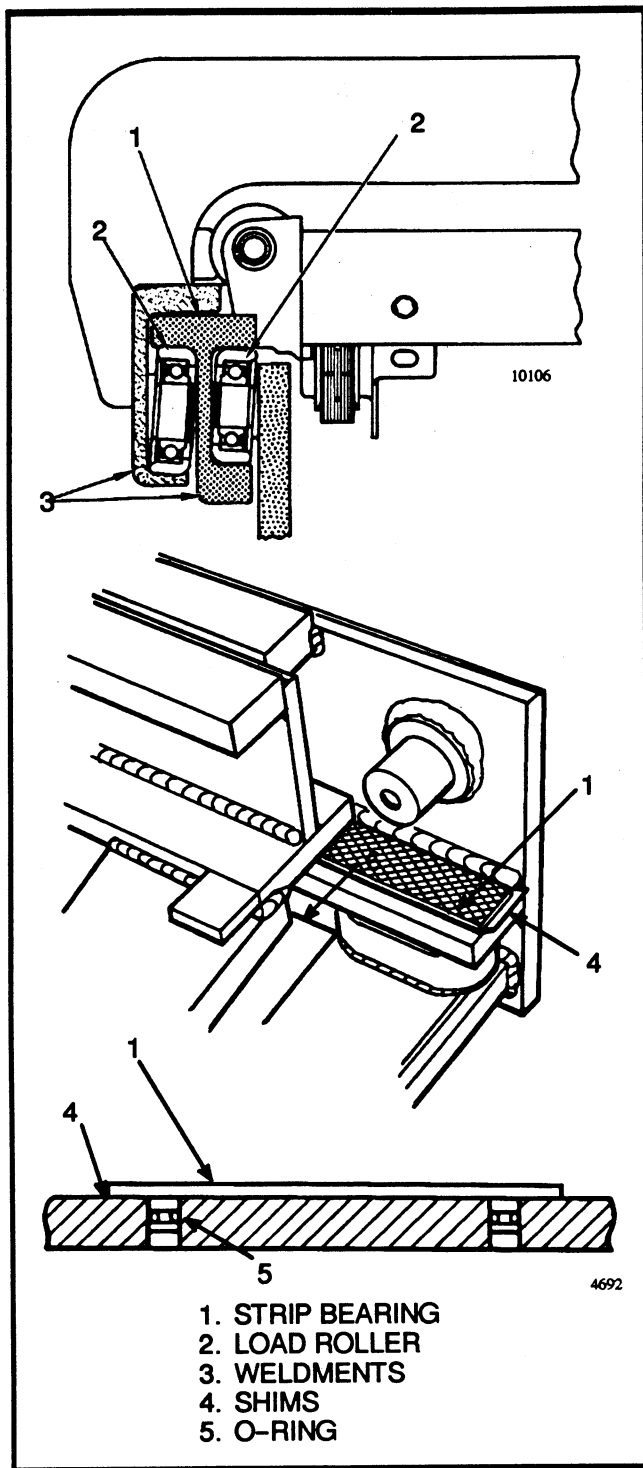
ADJUSTMENT OF THE STRIP BEARING
